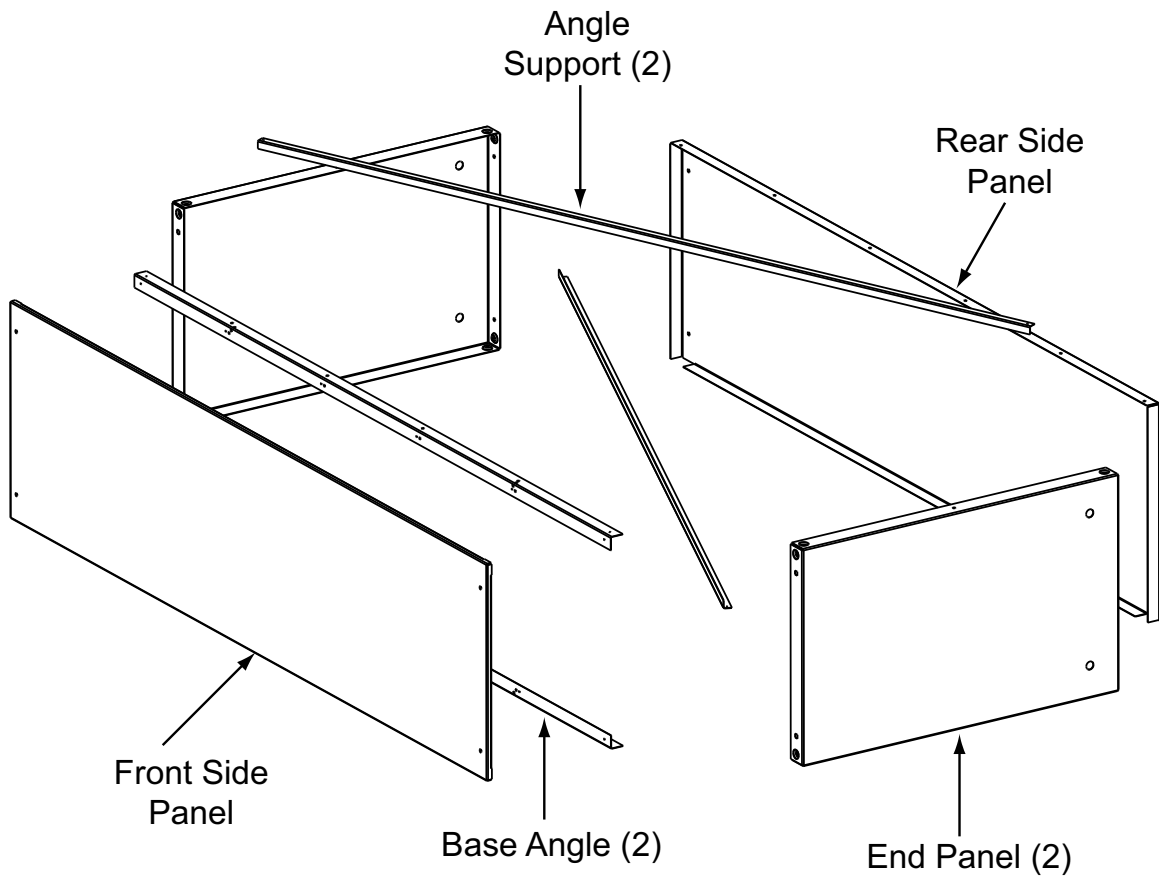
EXPLODED VIEW OF BASE MODEL 1BS0404
